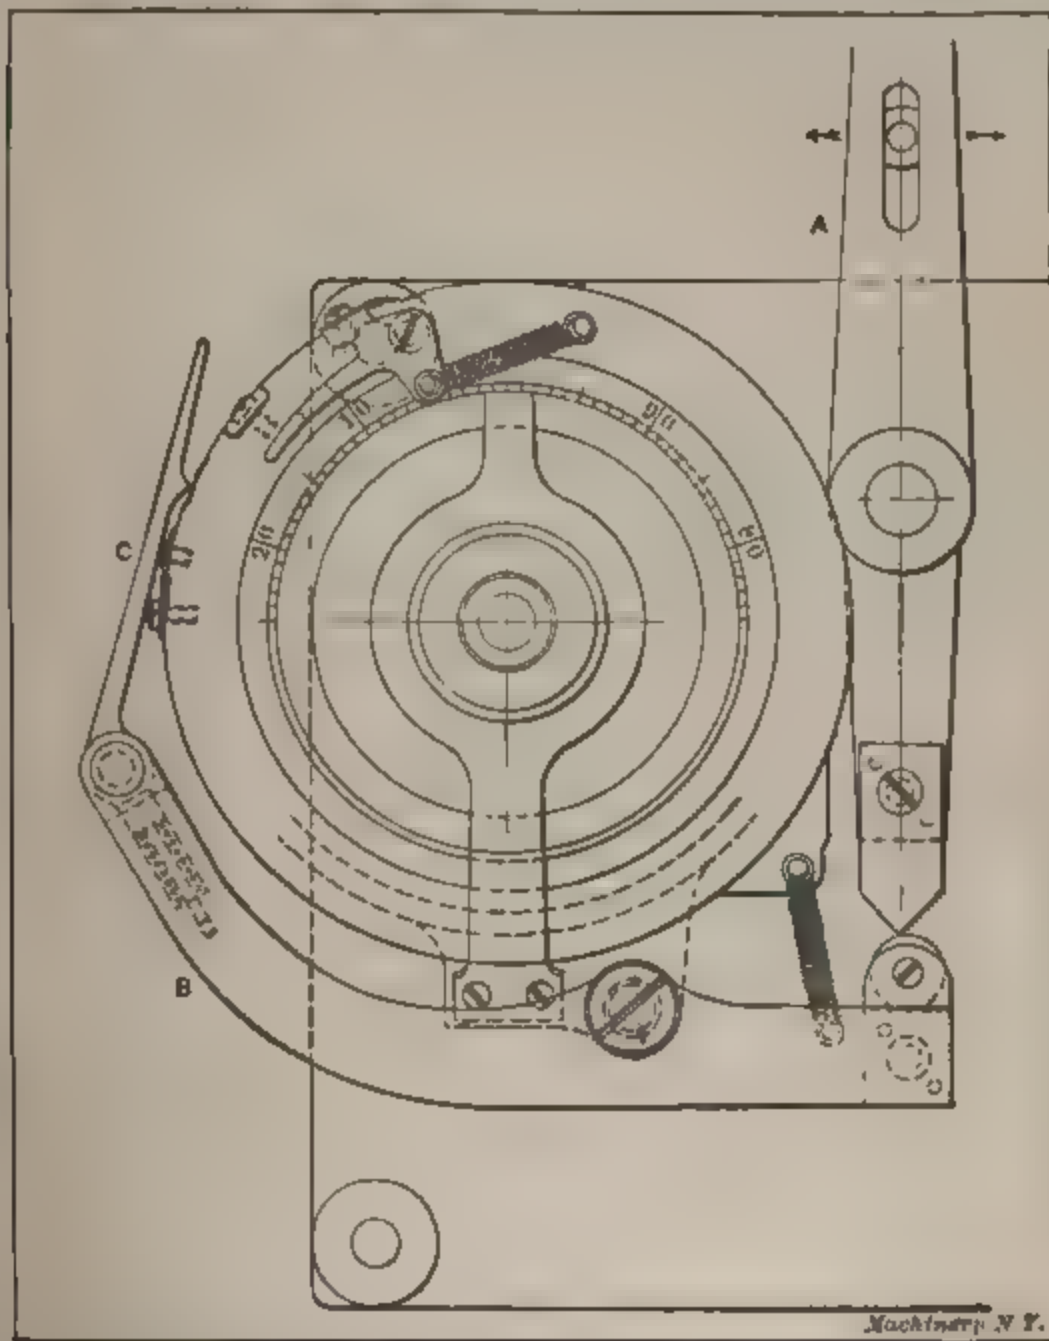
Combined Reversing and Feeding Mechanism for Grinding Machine
